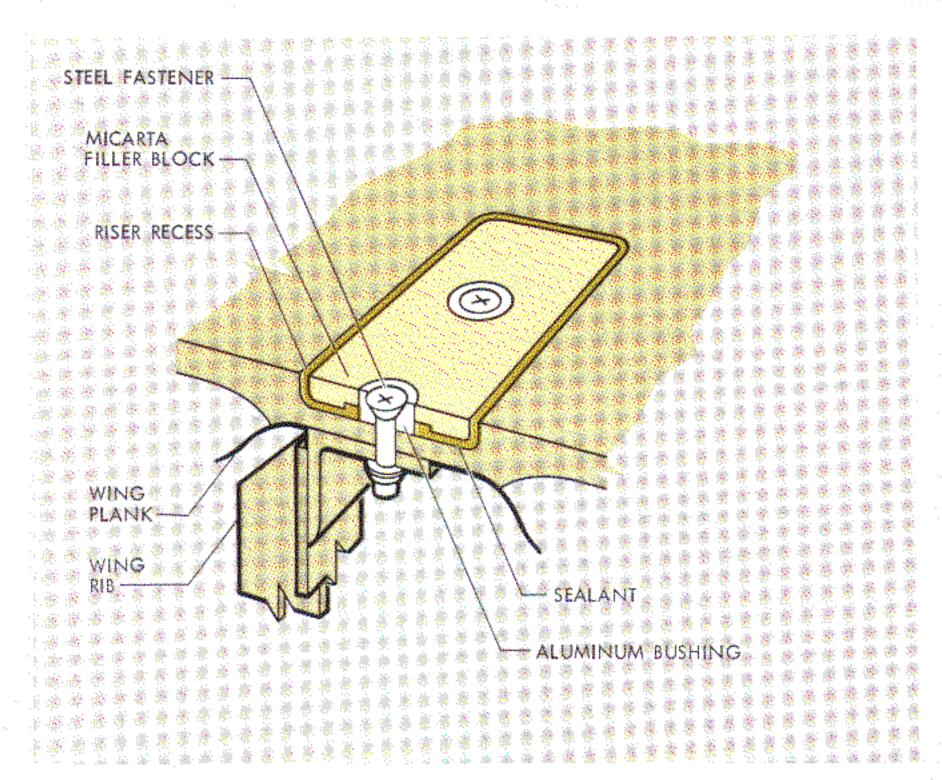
Older Style Centroid Riser Recess Micarta Filler Block
